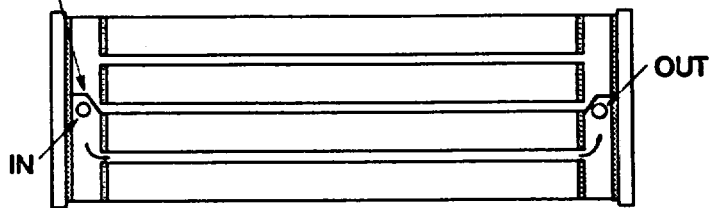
FIGURE II - END VIEW OF HEAT EXCHANGER ASSEMBLY
